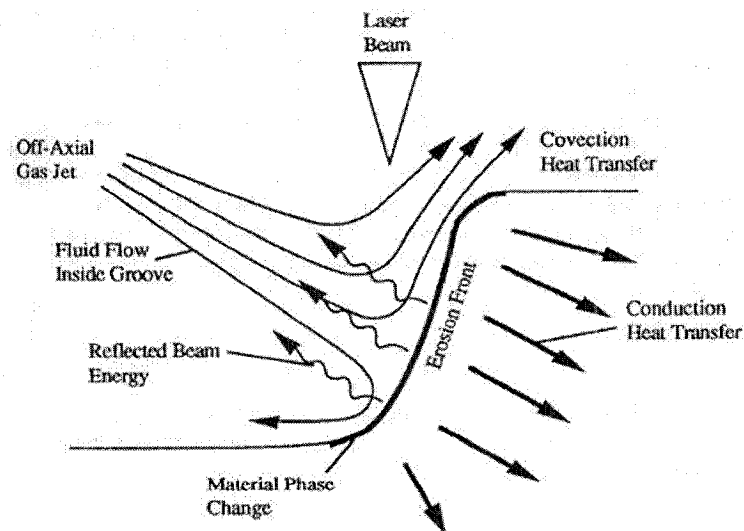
Heat transfer and fluid mechanics occurring during laser machining. (George Chryssolouris, 1991)
